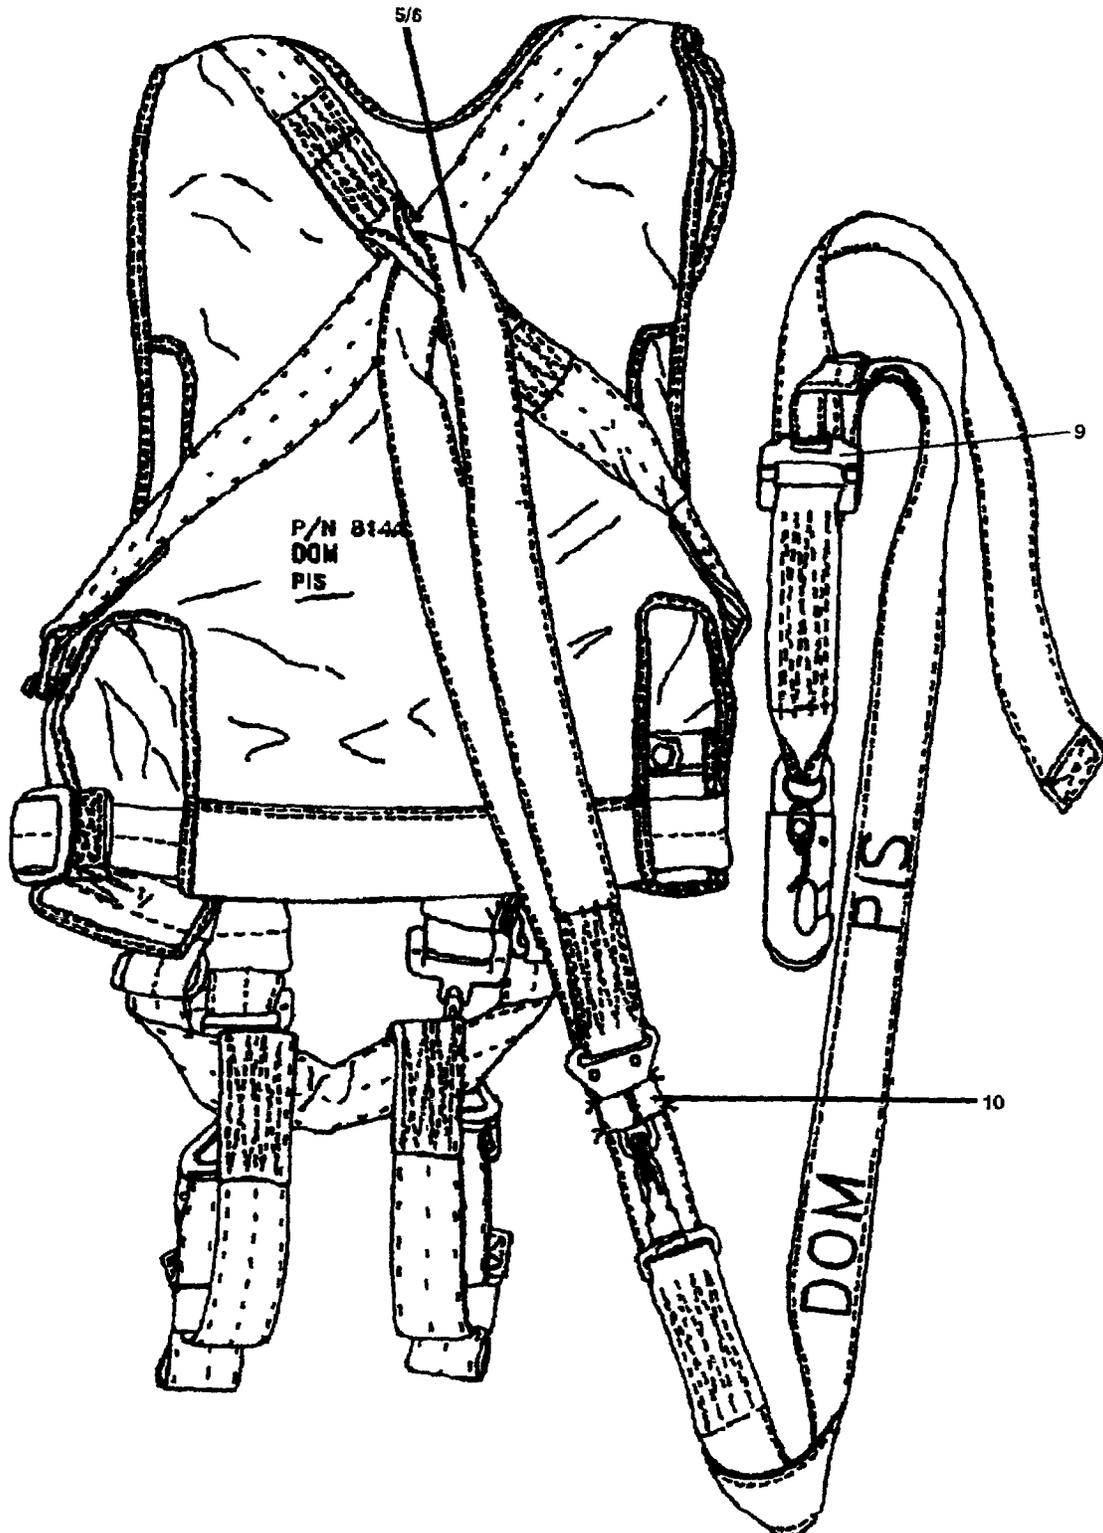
Crew Restraint Harness Assembly (Sheet 3 of 4)
